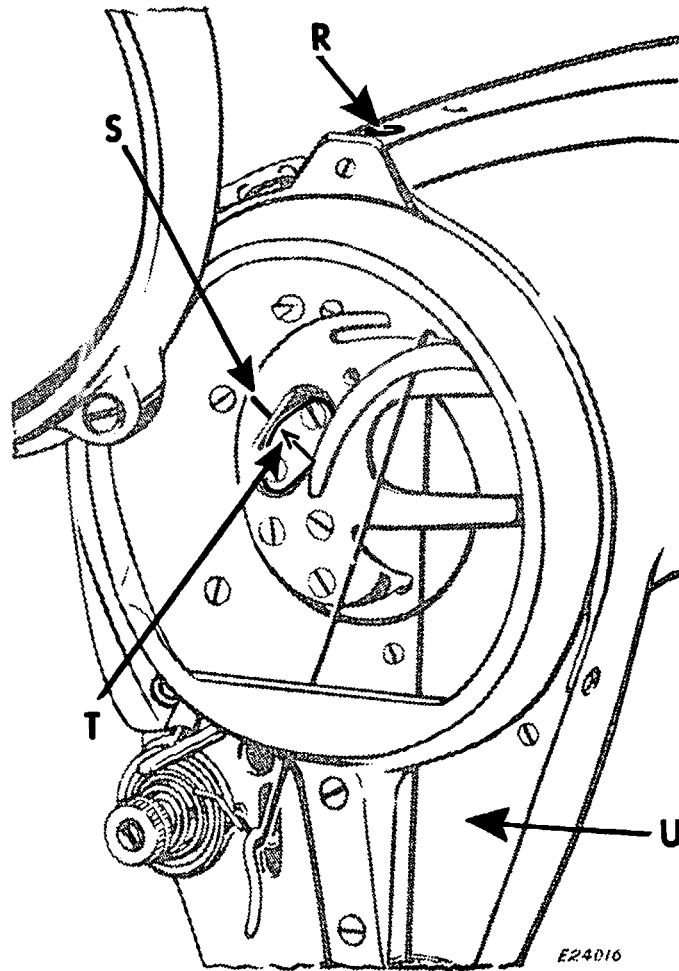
Showing Timing Marks on Take-up and Take-up Clamping Plate
